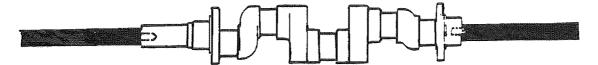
1" RODS SCREWED INTO BOTH ENDS OF SHAFT
